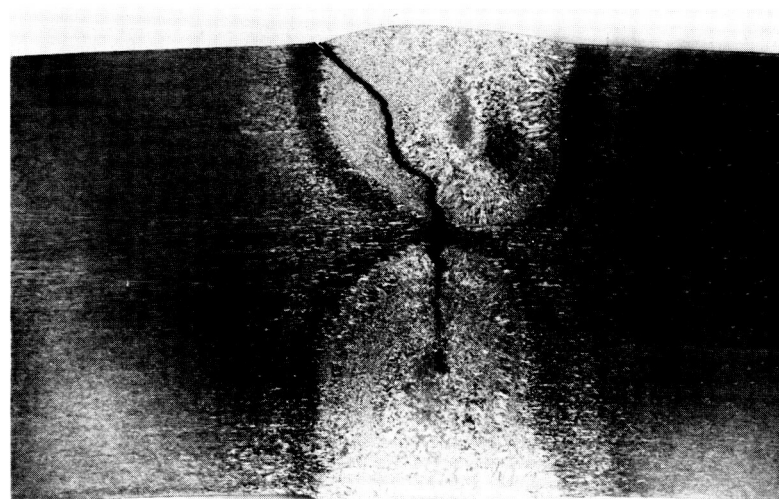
PROFILE AND LENGTH OF FRACTURE ON BOTH SURFACES IN PANEL A
